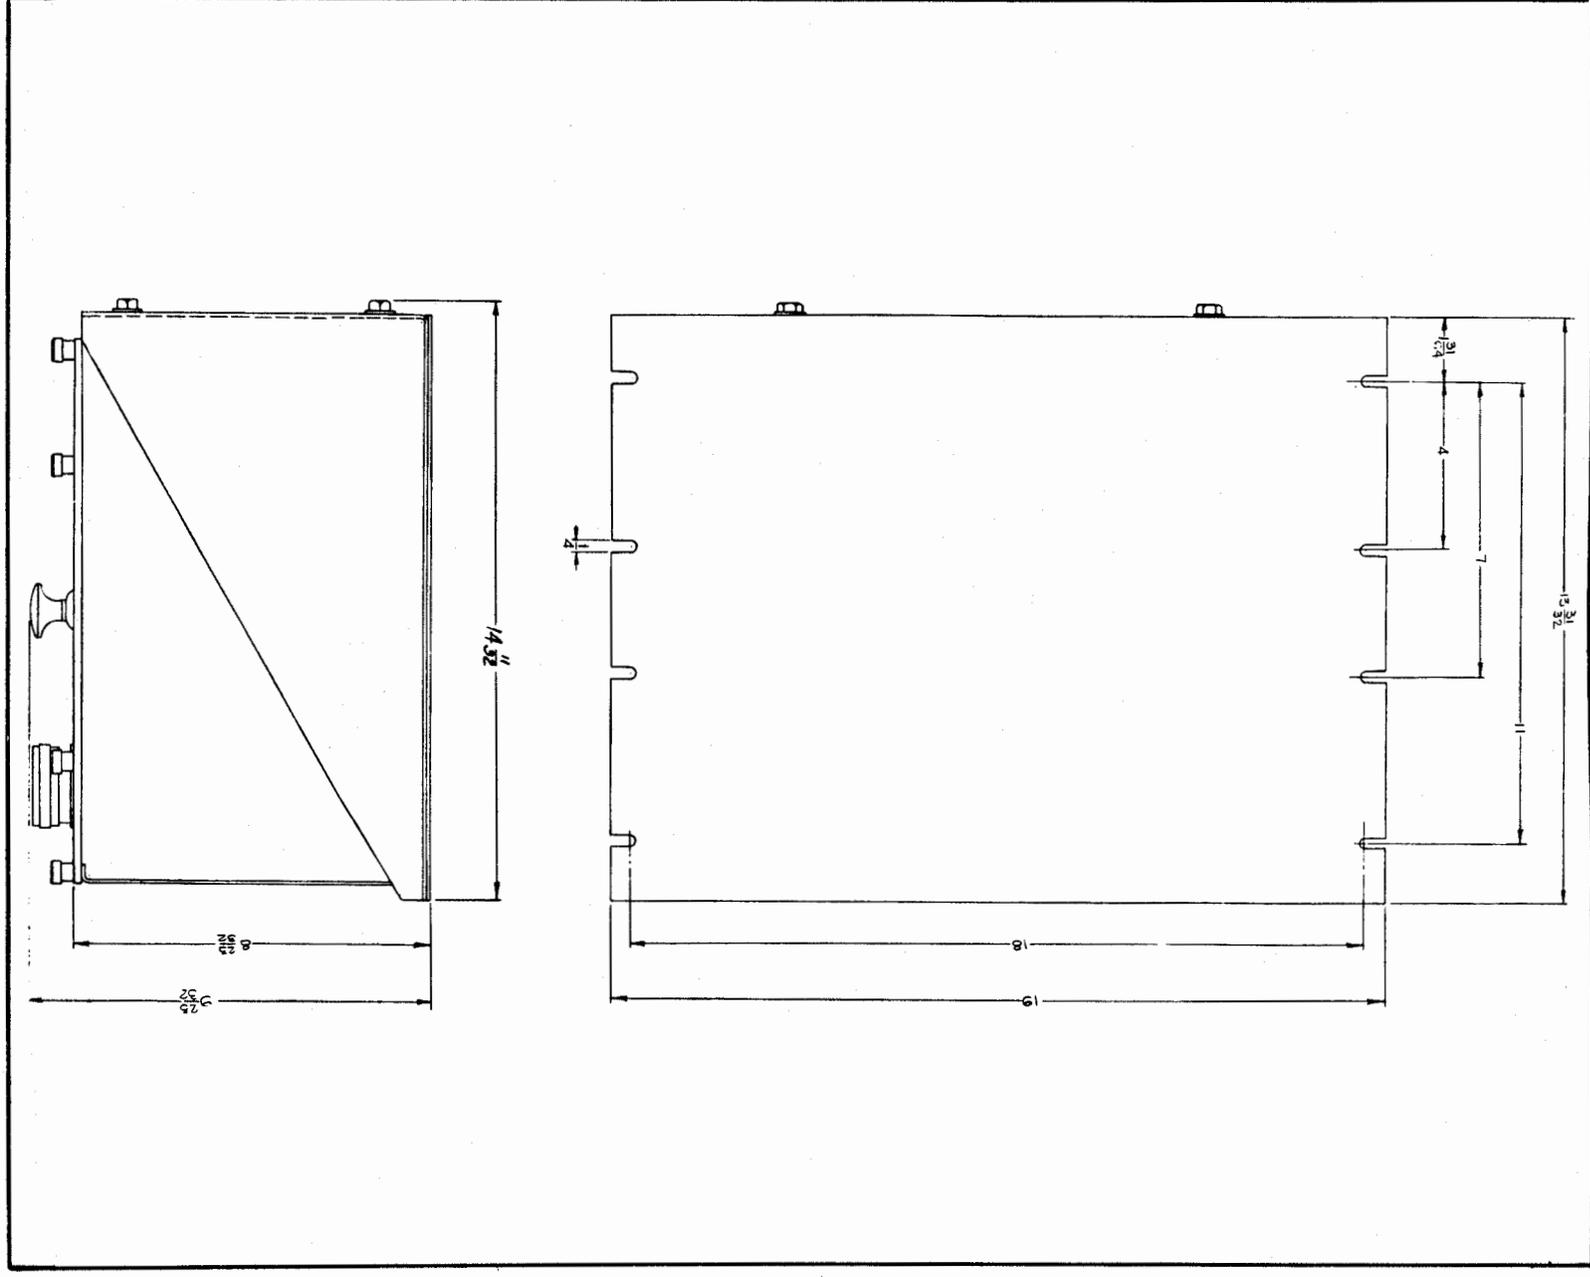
Power Unit Rack-Mounting Dimensions and Outline
